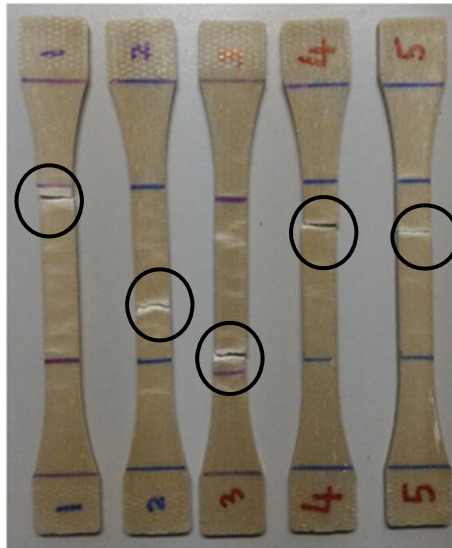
After testing specimens. The circles indicate the fracture area of the specimens
